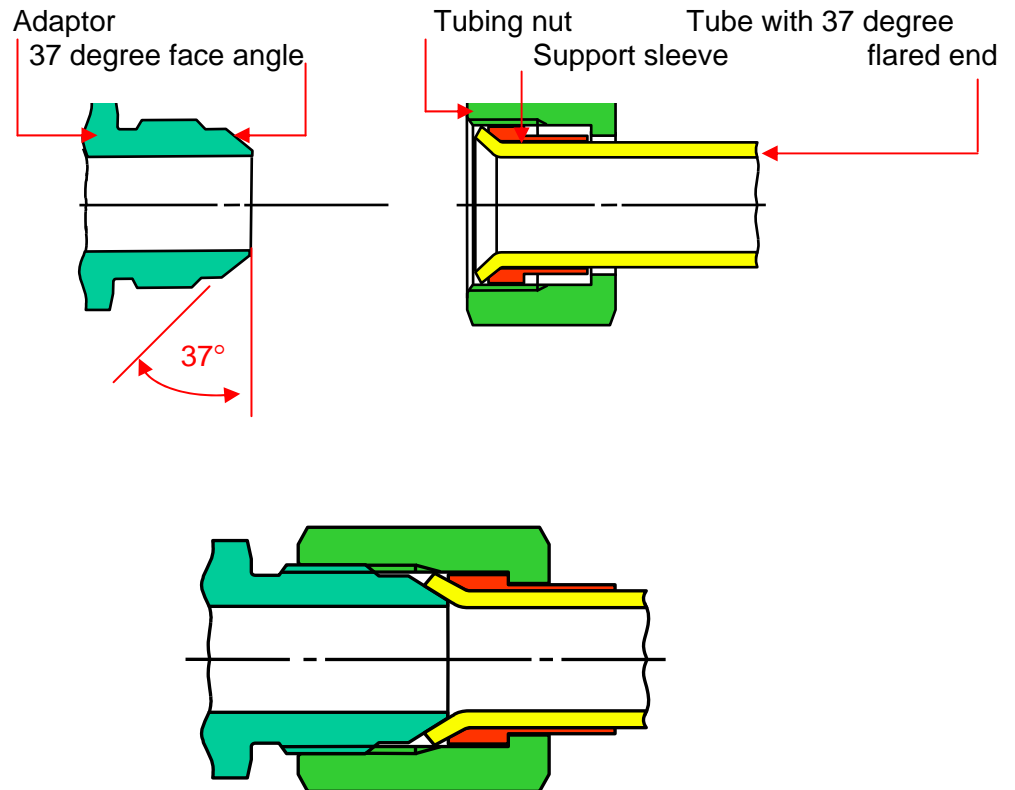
Parker Hannifin plc – Top image shows the JIC adaptor and tube end with support sleeve prior to assembly. The lower detail shows the components assembled. Due to the external angle on the adaptor, the opportunities for damage to the sealing surface are greatly increased. Correct tube flare is vital for effective sealing of the joint.
